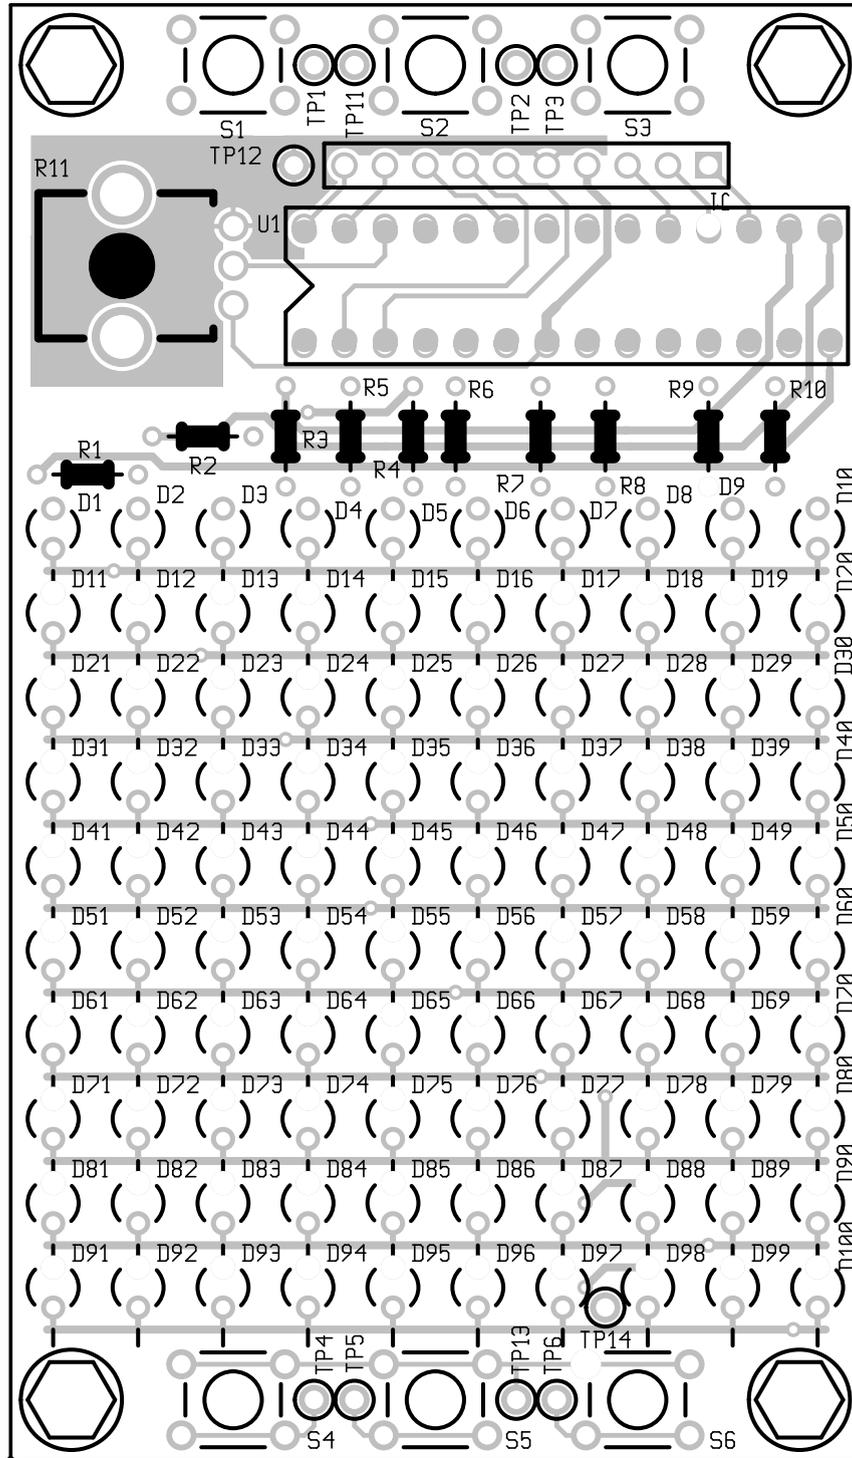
PICO1TR-LED-S Top Side Assembly Drawing (Rev 1)
